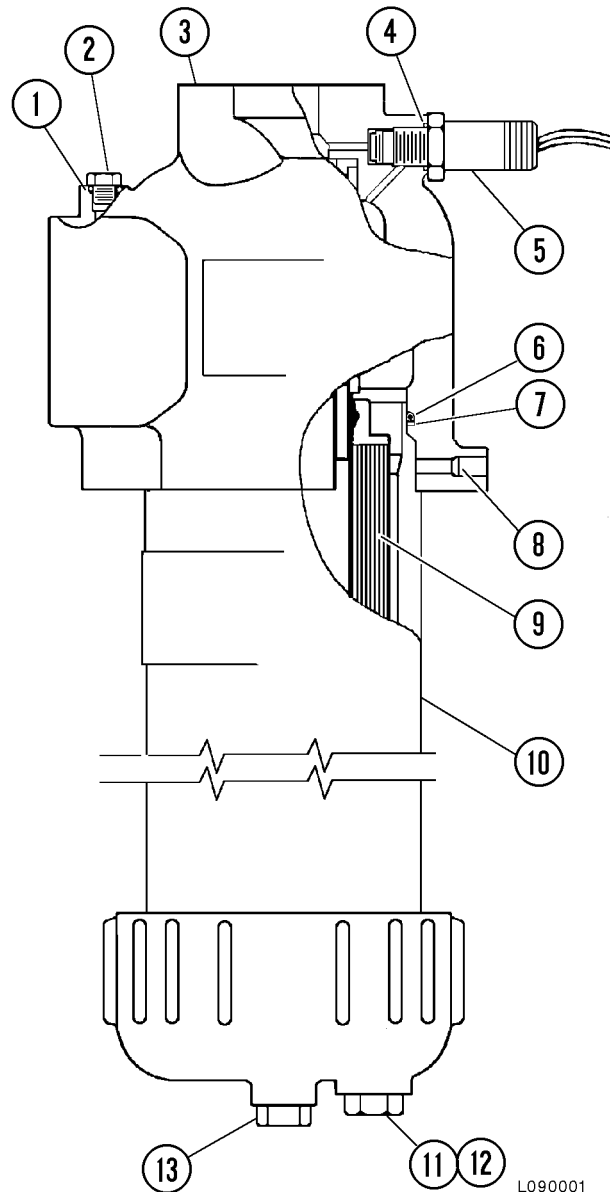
HOIST CIRCUIT FILTER ASSEMBLY
